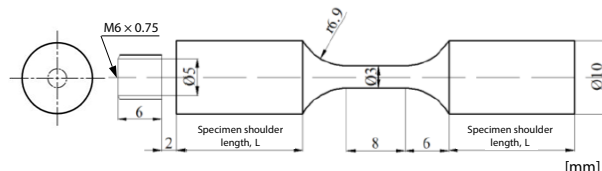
Hourglass-Shaped Specimen with Parallel Section
